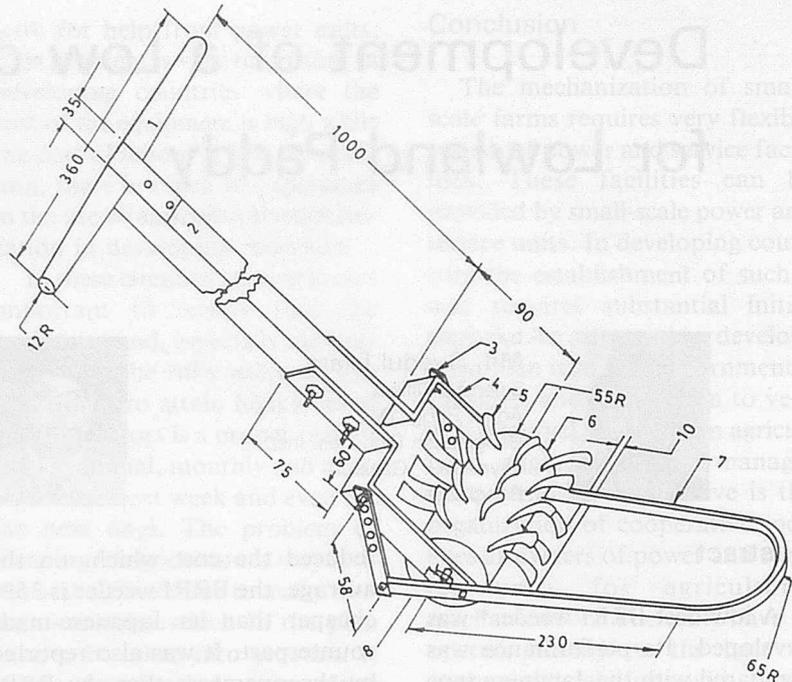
Push type weeder showing components: 1—Grip, 2—Handle, 3—Gauge bar, 4—Frame, 5—spike, 6—150mm long wooden core, 7—Skid-frame, 8—Axle. Unit: mm.
